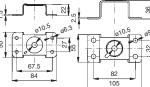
Picture C Mounting angle for magnetic holder 9XD 130 261-001
